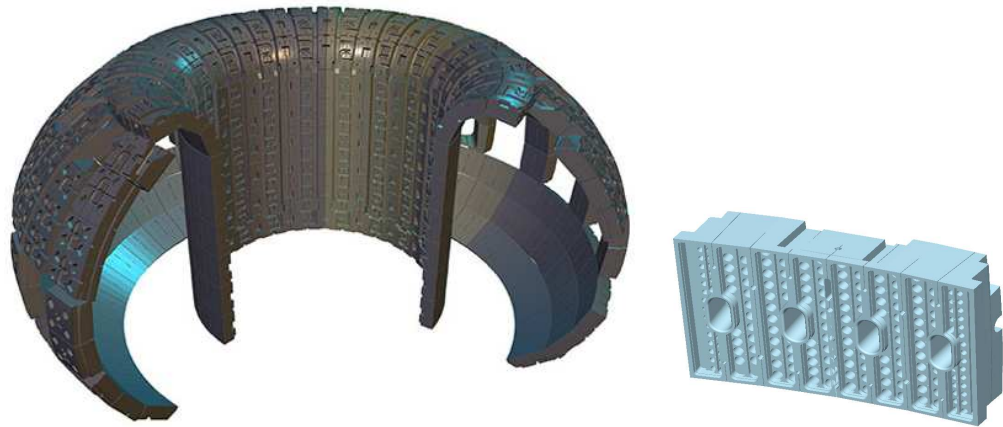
CAD rendering of the ITER blanket modules [8]
